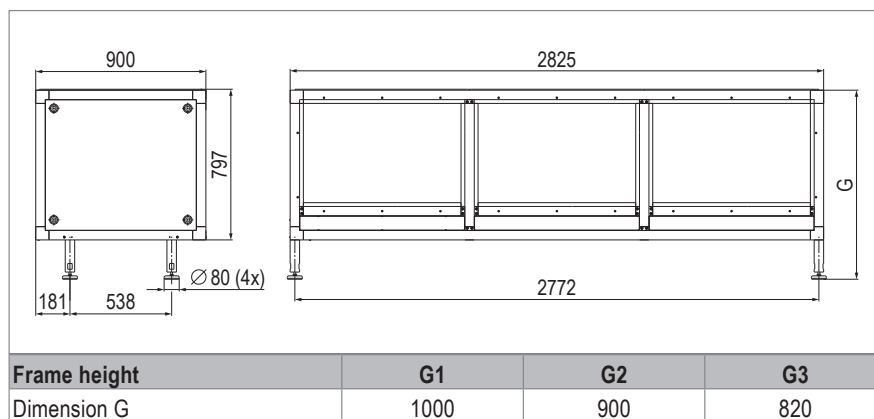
Dimensional drawing supply air box (dimensions in mm)
